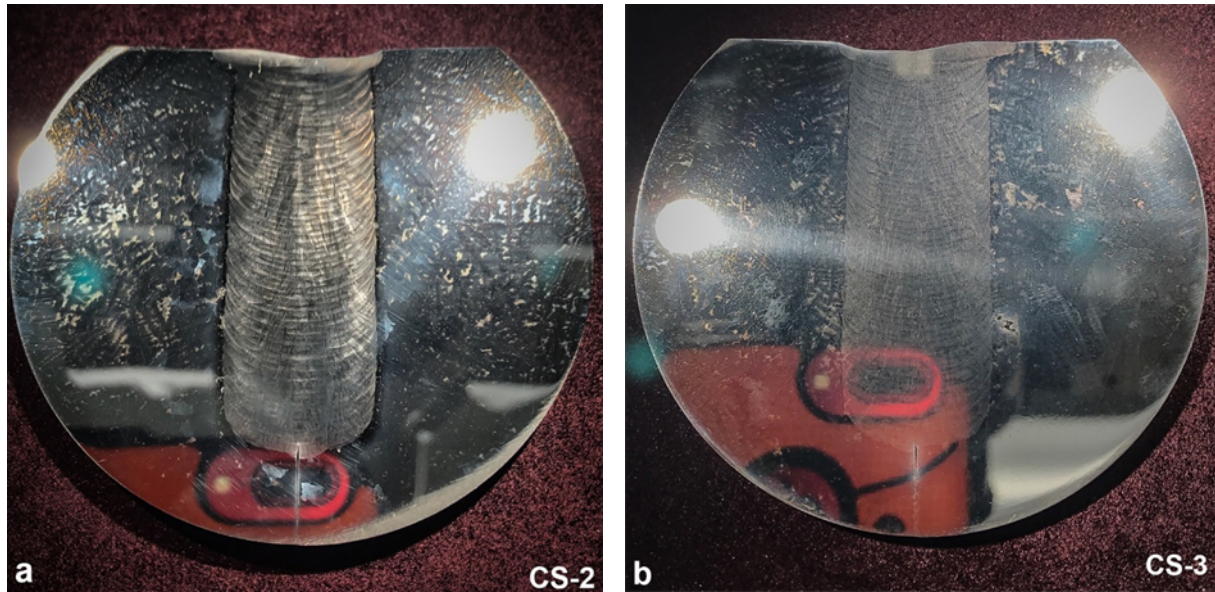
Photographs of full-section weld deposit (a) as-welded, and (b) after post-weld strengthening heat treatment
